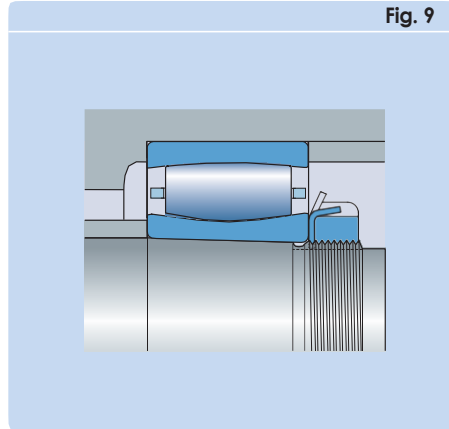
Inner ring on a tapered seat held in place by a shaft nut
